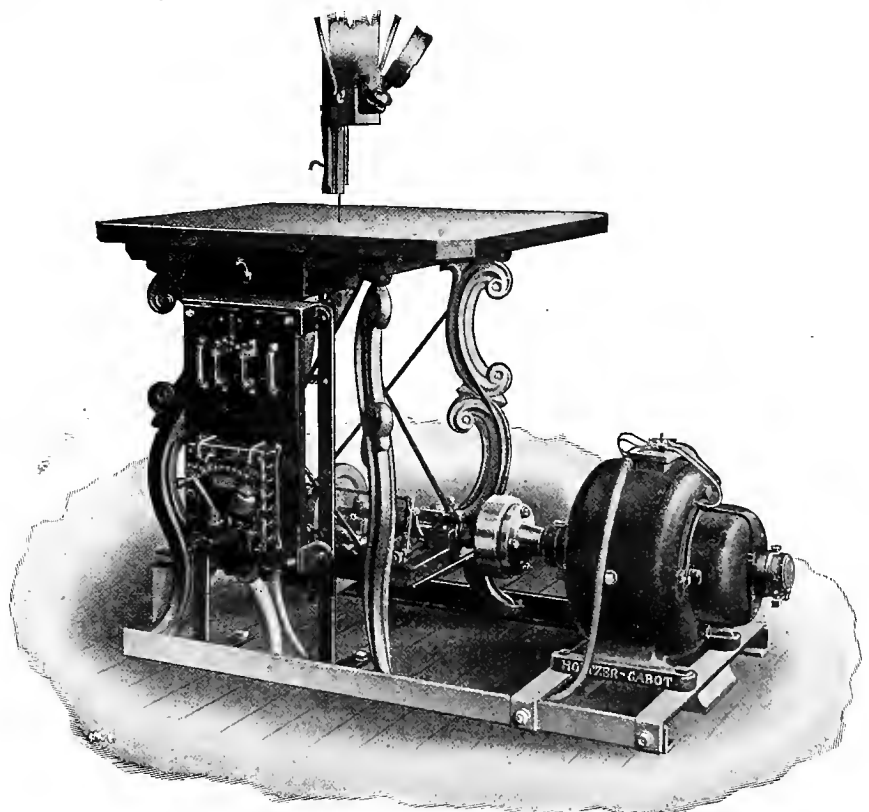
EUREKA JIG SAW DRIVEN BY ELECTRIC MOTOR
